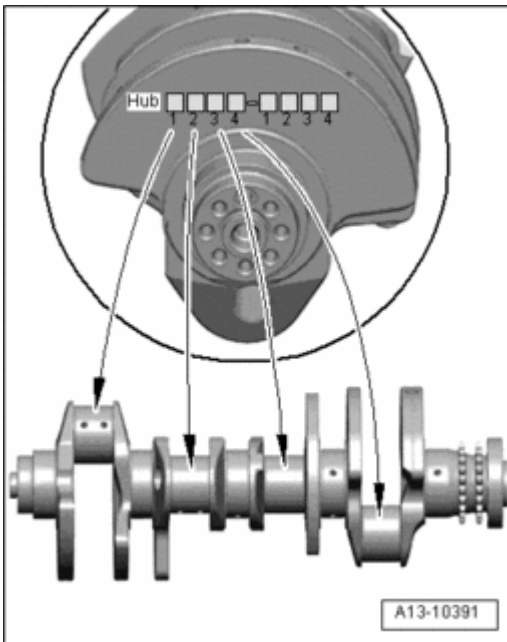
Allocation Of Connecting Rod Bearing Shell Thickness To Crankshaft
